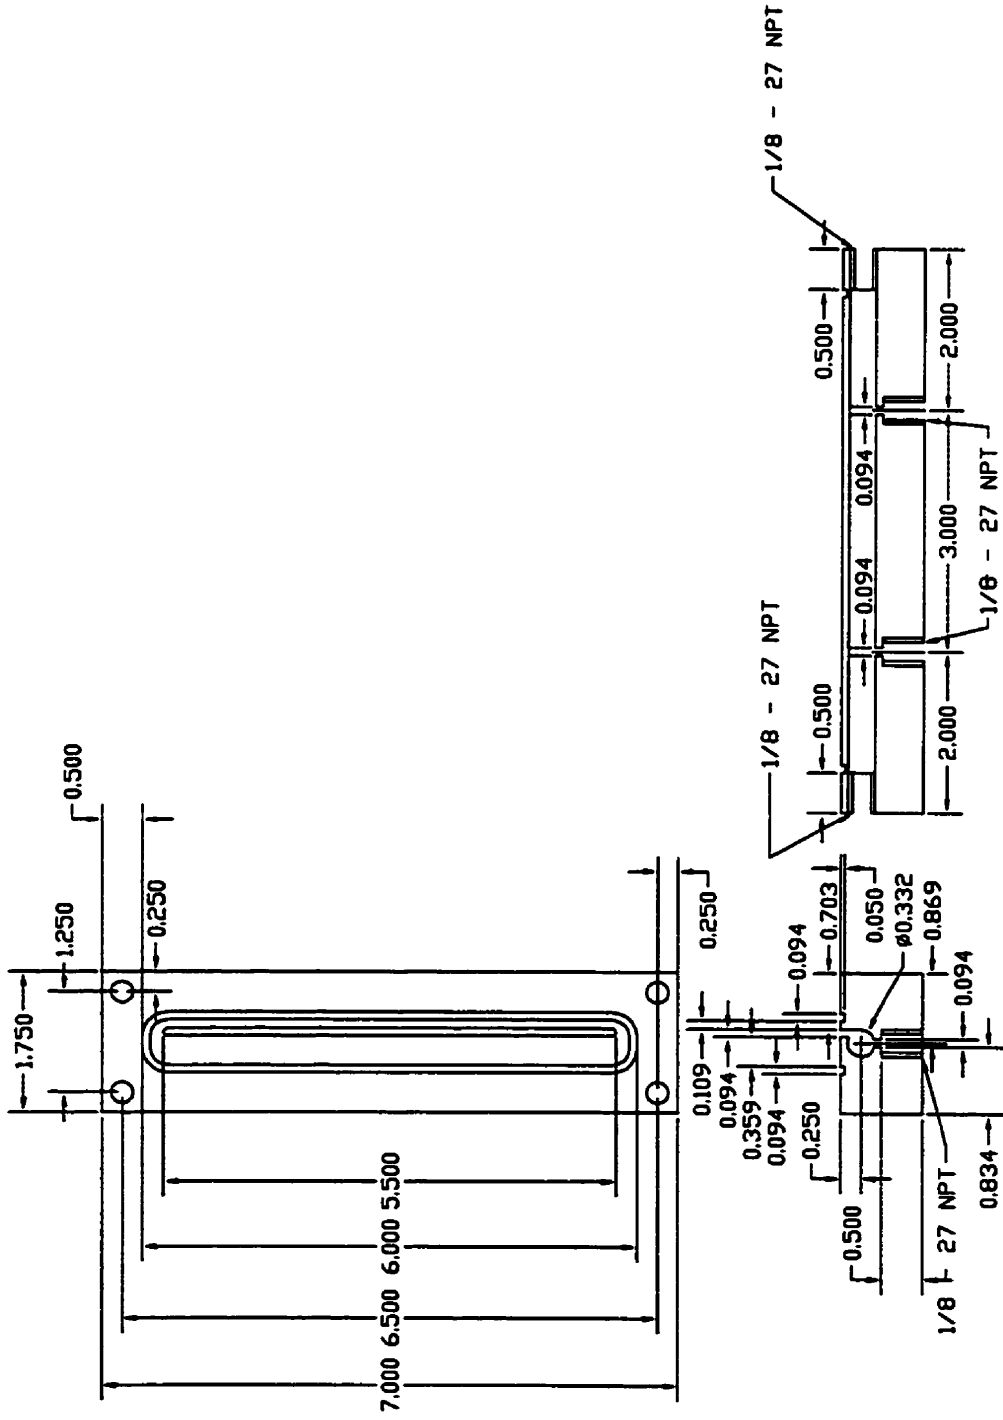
Coolant Side Inlet/Exit Manifold.
